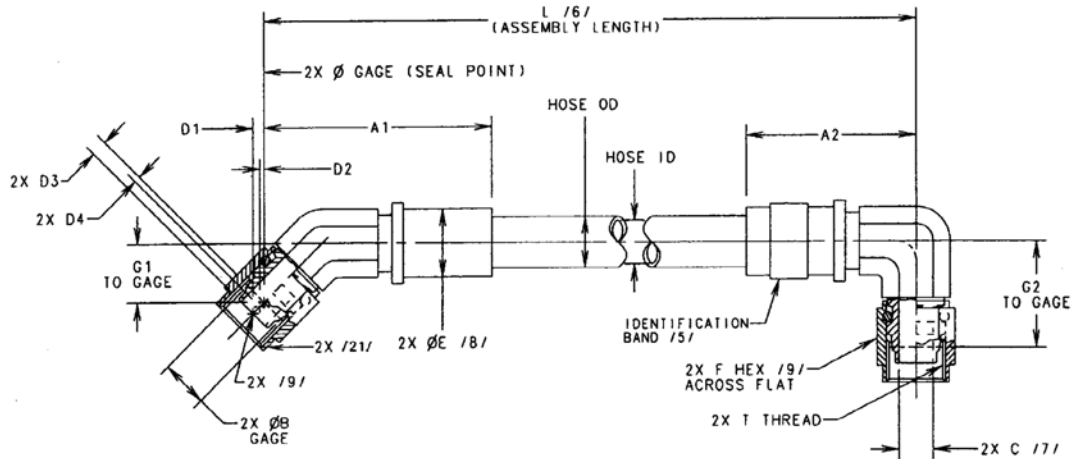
FLARELESS HOSE ASSEMBLY, 45° TO 90° ELBOW
